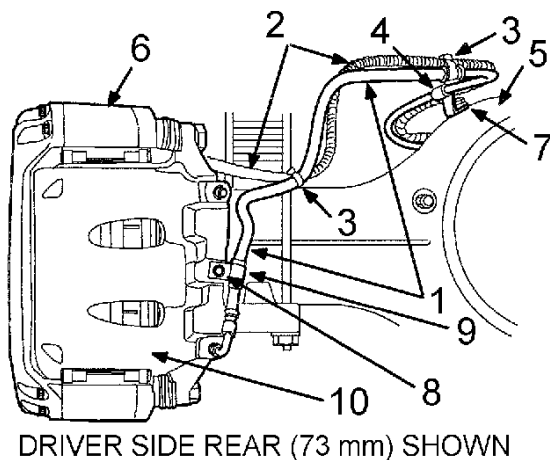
Removing Brake Line Retaining Clips from Rear Axle and Caliper
